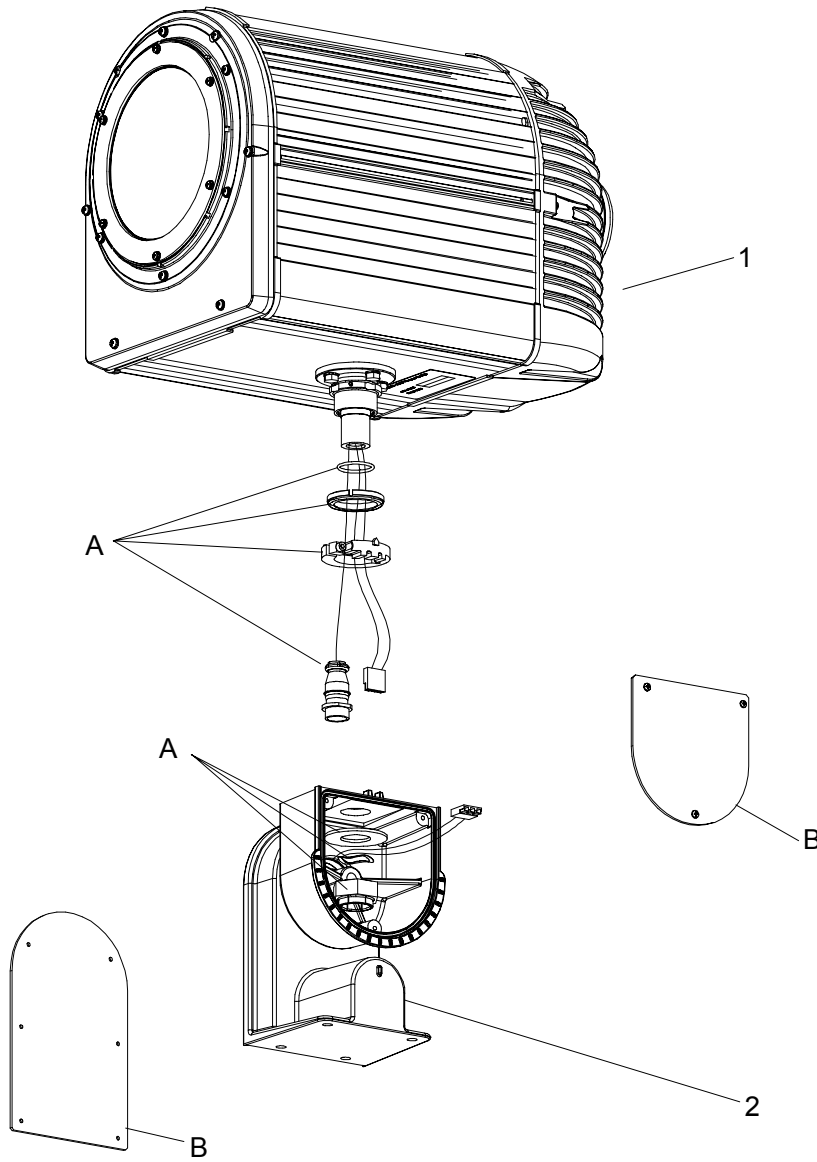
Head and Remote Head Assembly Drawing Tree
